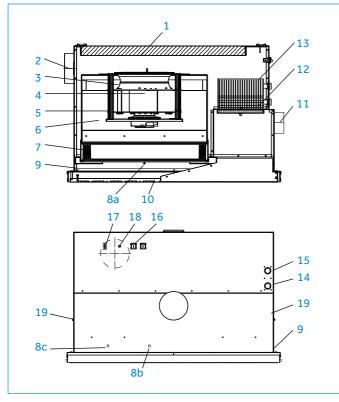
PIFF module with air grill 10, ceiling installation frame 9 and Prefilter 12 : construction
